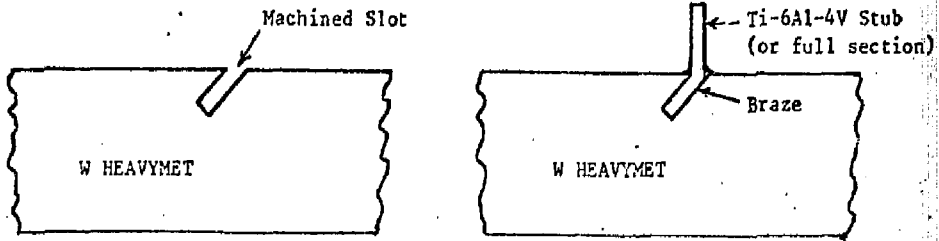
SELF FIXTURING DESIGN FOR BRAZING
